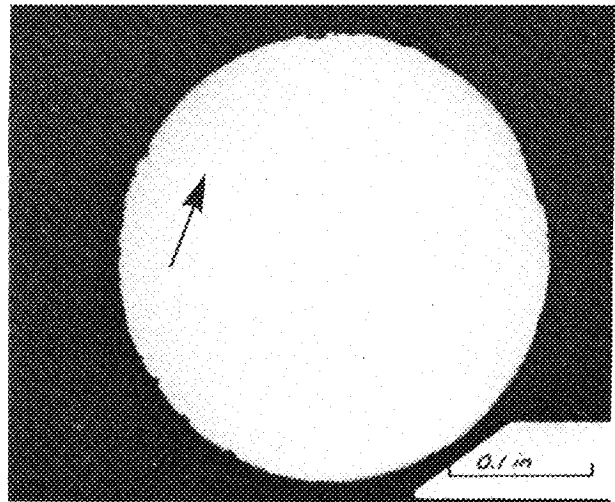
Whisker growth (arrowed) in the plated-through hole of a printed circuit board having a bright tin finish (18).
